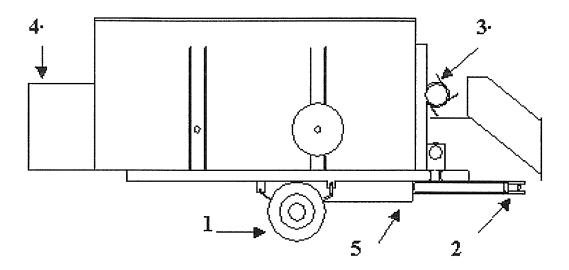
Schematic of straw walker assembly (inlet housing not shown)
